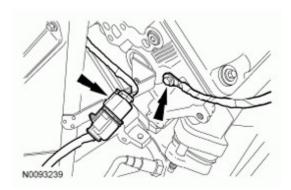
Locating Ground Strap And Bolt Courtesy of FORD MOTOR CO.
